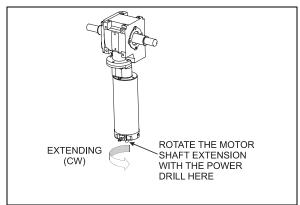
SLIDE-OUT MOTOR ROTATION
